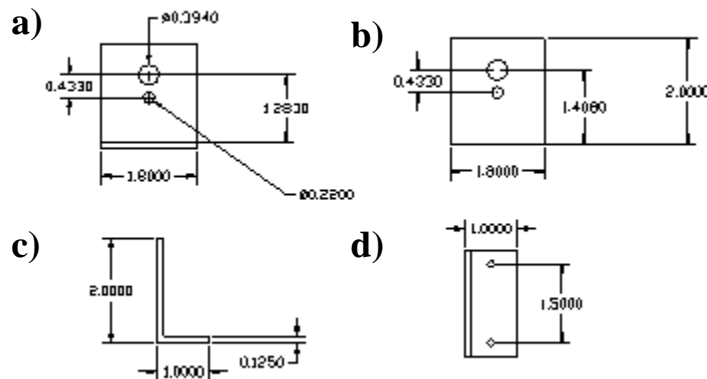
CAD drawing of the (a) front (b) back (c) right (d) top view of the optical insert (units in inches)
